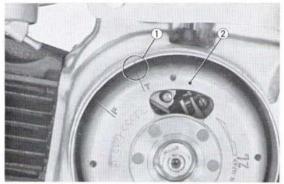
① Left crankcase index mark ② Flywheel
